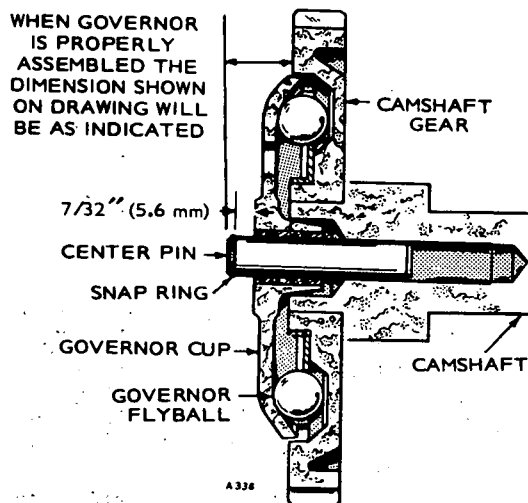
GOVERNOR CUP (CROSS SECTIONAL VIEW)
